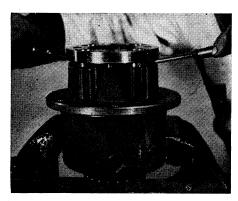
Pry off high speed clutch plate; take out idler pinions and pins
